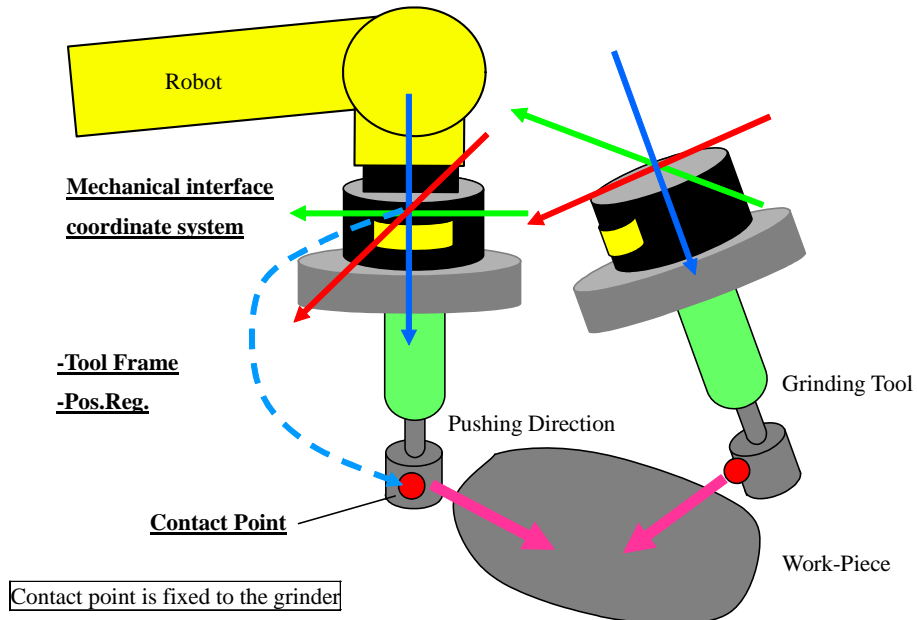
(e) Example 1 of setting TOOL to "3-Axis FS ContactP. Position"
